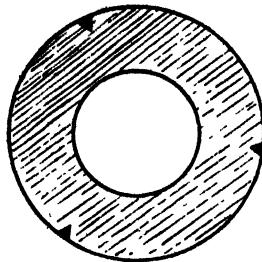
Plan of valve, showing points of attachment of rubber disc.
